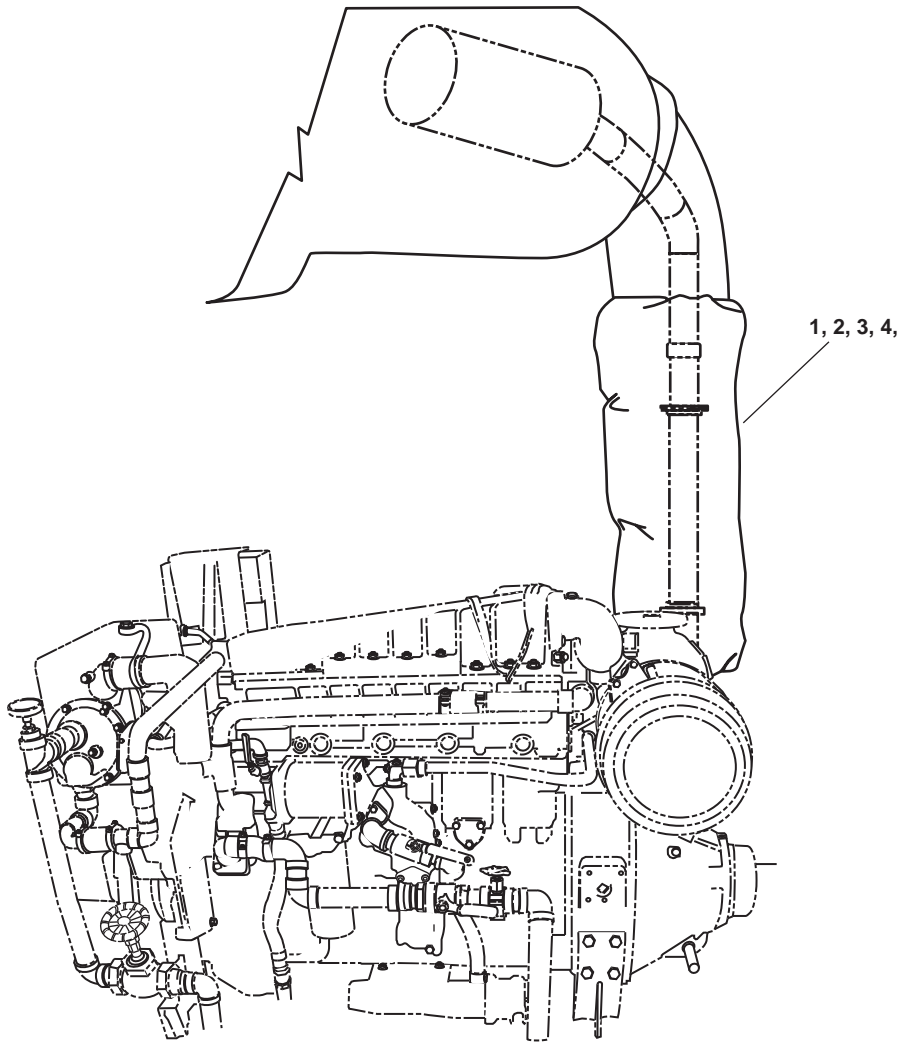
Engine Exhaust System (Sheet 1 of 3)
